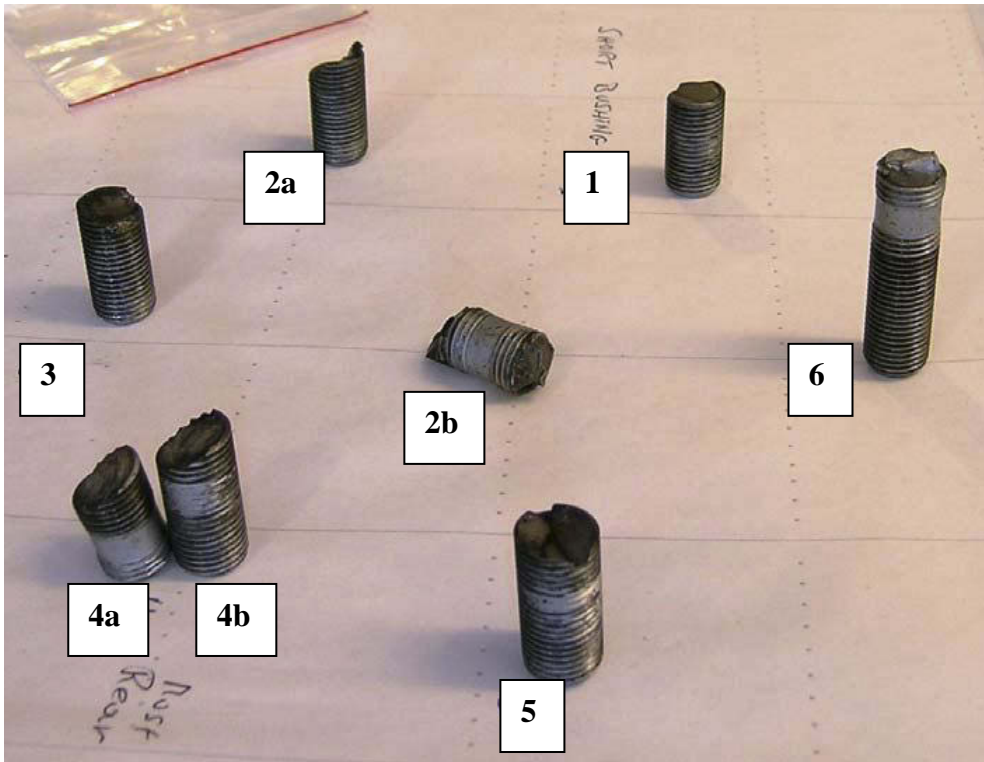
The bolts that were removed from the engine flange. Bolts 1, 3 and 5 have similar fracture pattern and different from 2, 4 and 6 which together have similar fracture pattern.
